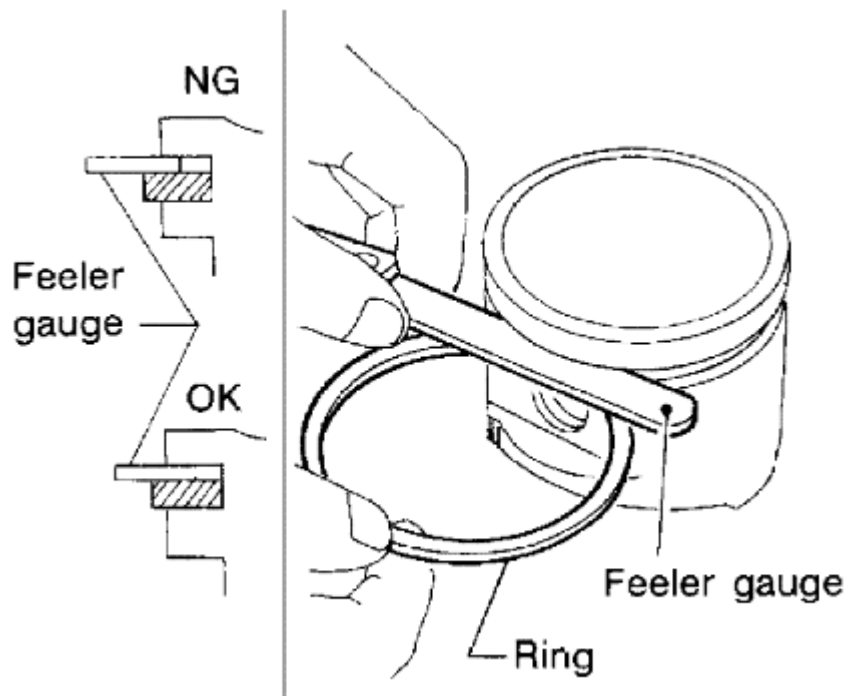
Measuring Side Clearance Of Piston Ring And Piston Ring Groove
